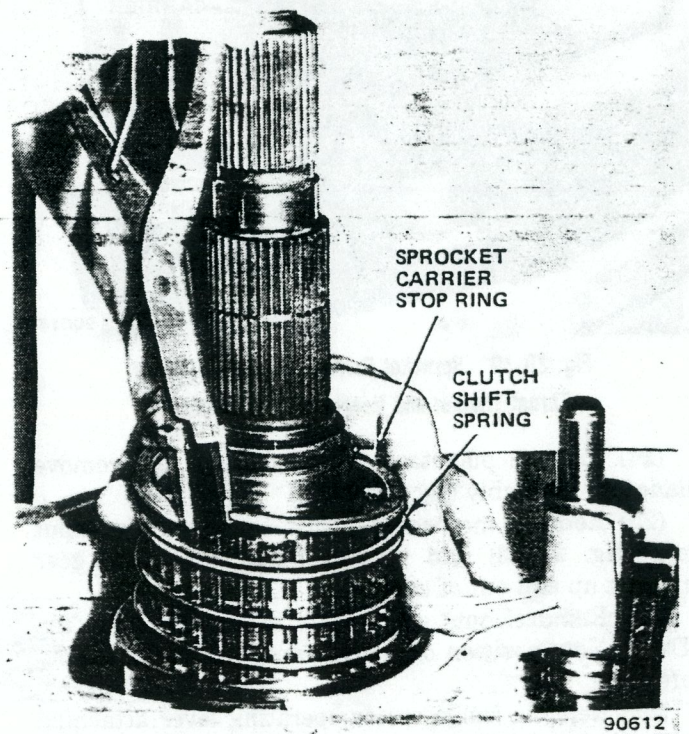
D-17 Sprocket Carrier Stop Ring and Clutch Spring Removal/Installation
